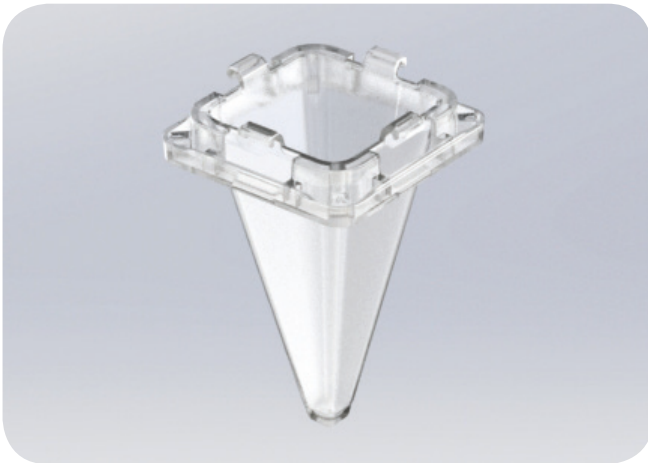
STRATEC Stackable Cuvette with the interlocking hook-and-eye design
